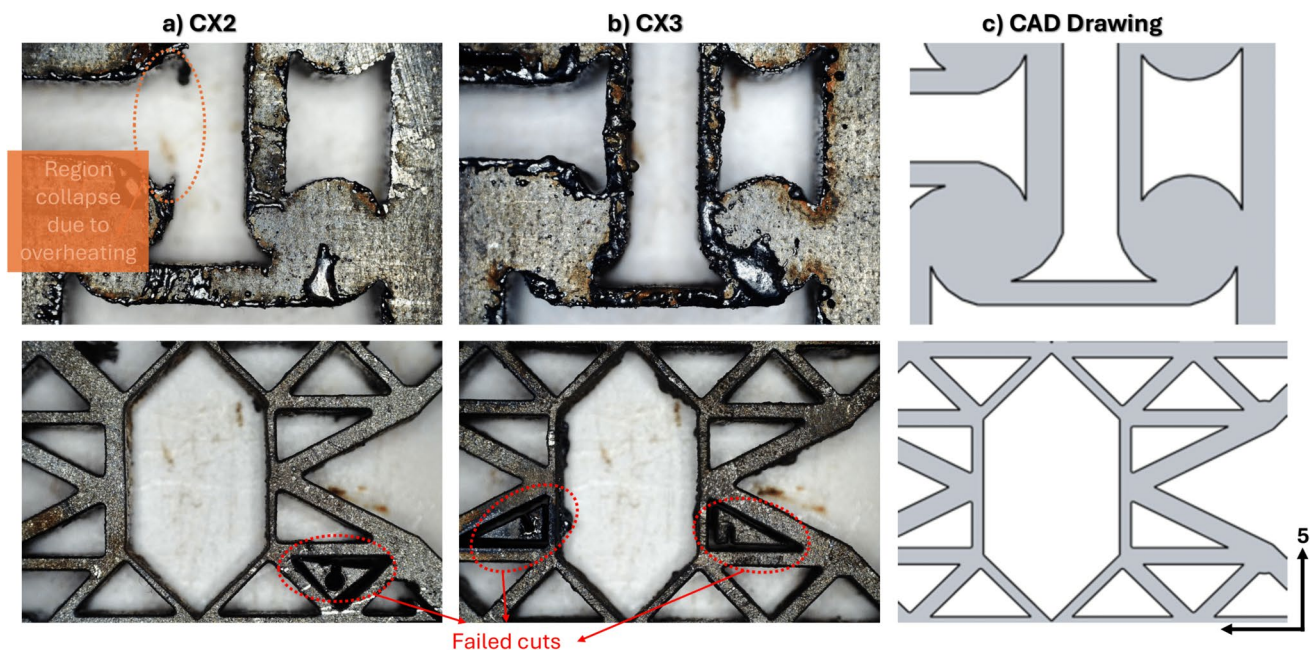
Fine-feature laser cuts in region IX and X using (a) N_2 , (b) compressed Air, and (c) CAD drawing (units in mm)
